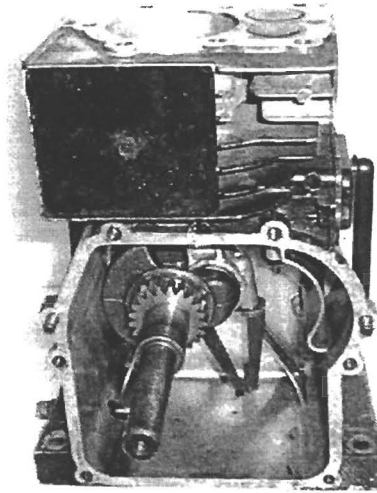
2: Lawn Mower Engine to be used For Compressor
